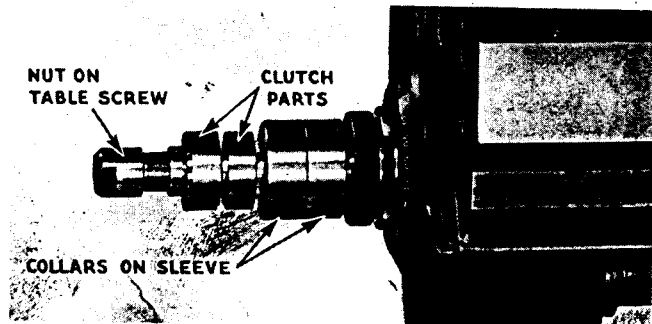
(above) and Fig. 19 (below). Parts to be removed for installing "Gear on Screw". In lower illustration the ball crank, ball crank clutch, and sleeve have been removed and the nut on table screw loosened.
